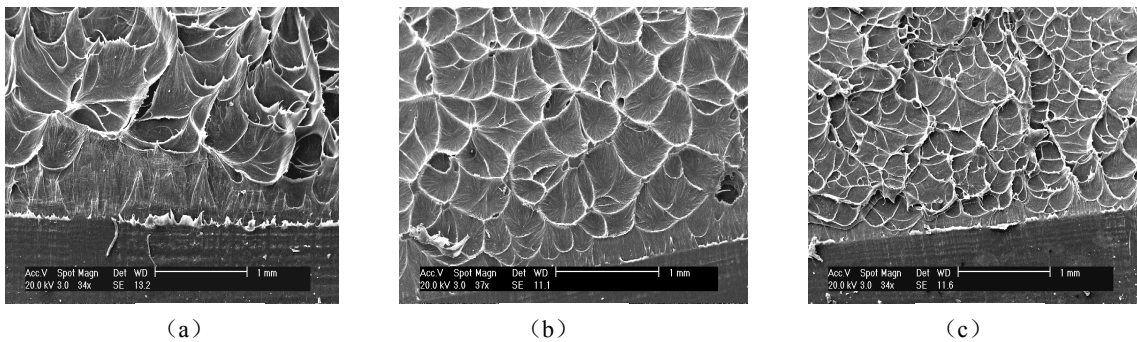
Scanning electron micrographs of fracture surface of HDPE Butt-fusion welded joint (a) 20°C (b)-40°C (c)-78°C
